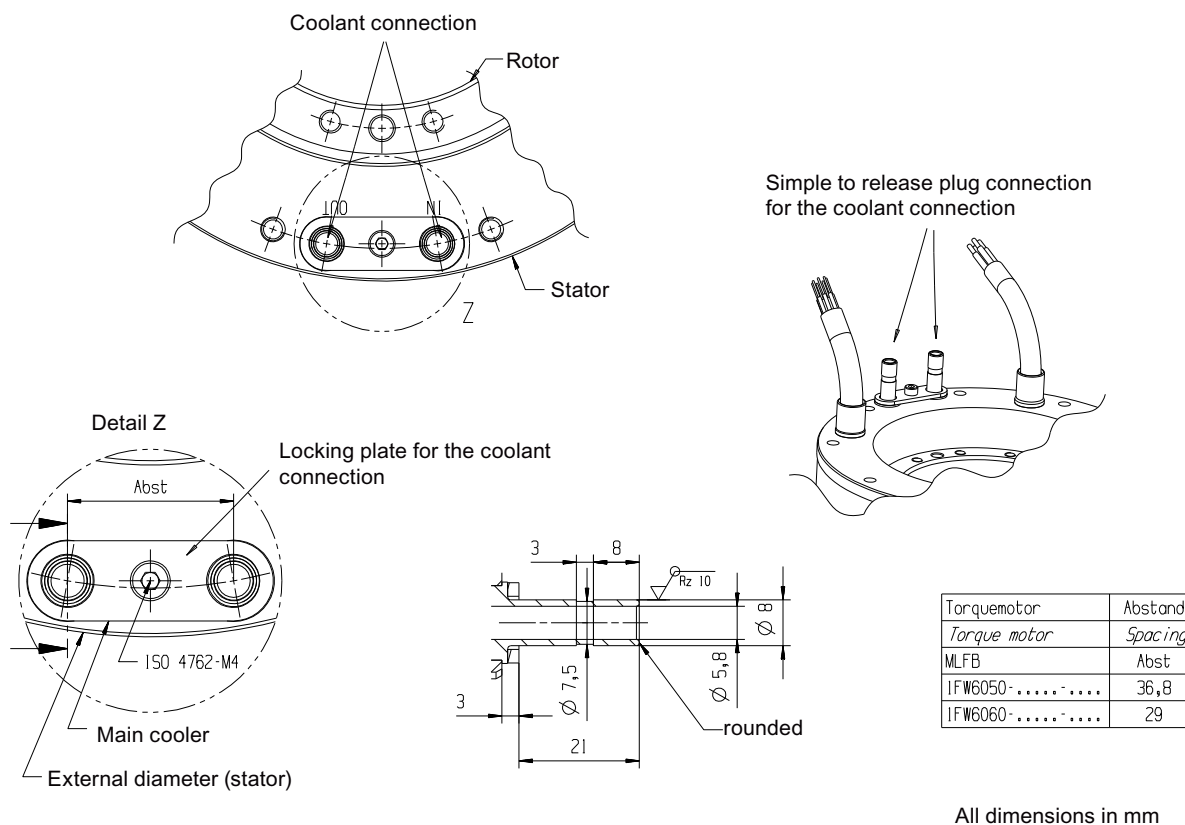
Axial cooler connection with sleeve for 1FW6050 and 1FW6060
